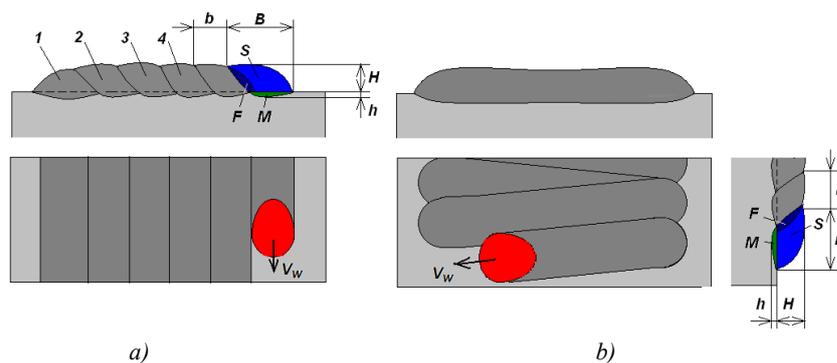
Typical dimensions when surfacing with bead welds (a)
